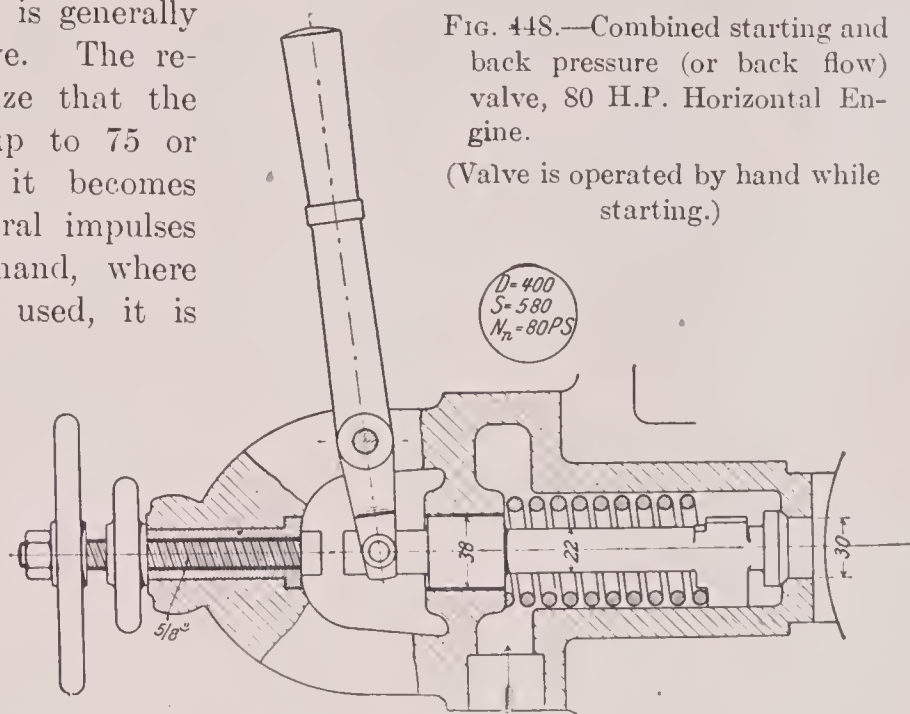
Combined starting and back pressure (or back flow) valve, 80 H.P. Horizontal Engine.
